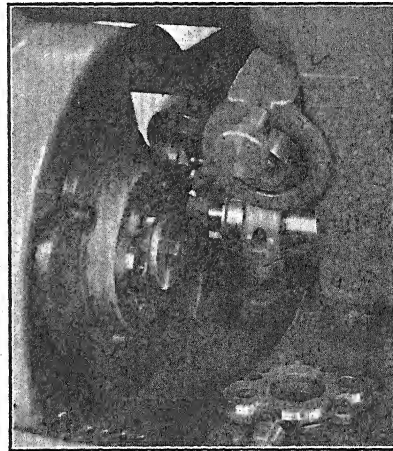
A Setup on the Bryant No. 12 Internal Grinding Machine for Cam Attachment Grinding and Facing.
